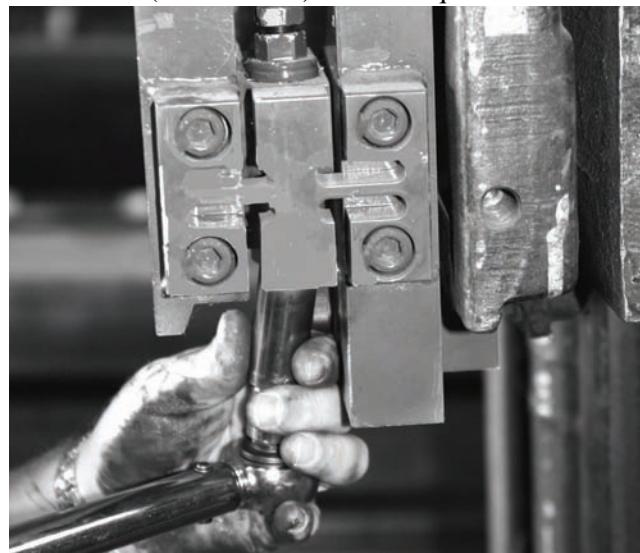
Loosen and Remove Bottom Hex Nut (#18 and #19 on Parts Breakdown)
